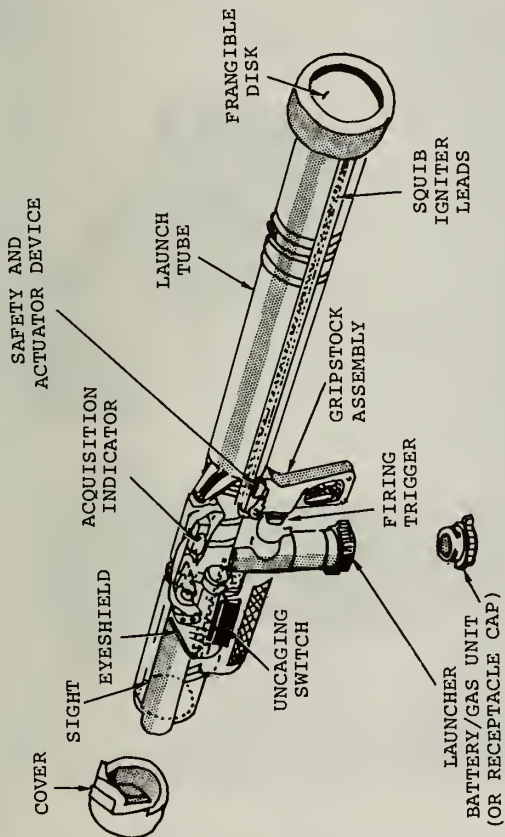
Redeye Launcher XM41E2 (Exploded View).
